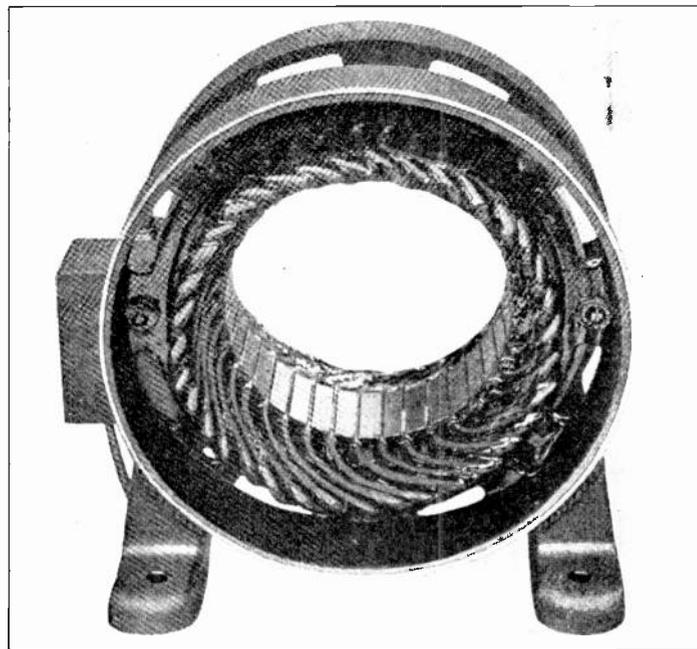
This view shows a stator of an induction motor with the end shields and rotor removed. When A. C. is applied to the winding a revolving magnetic field is set up around the inside of the stator core.
